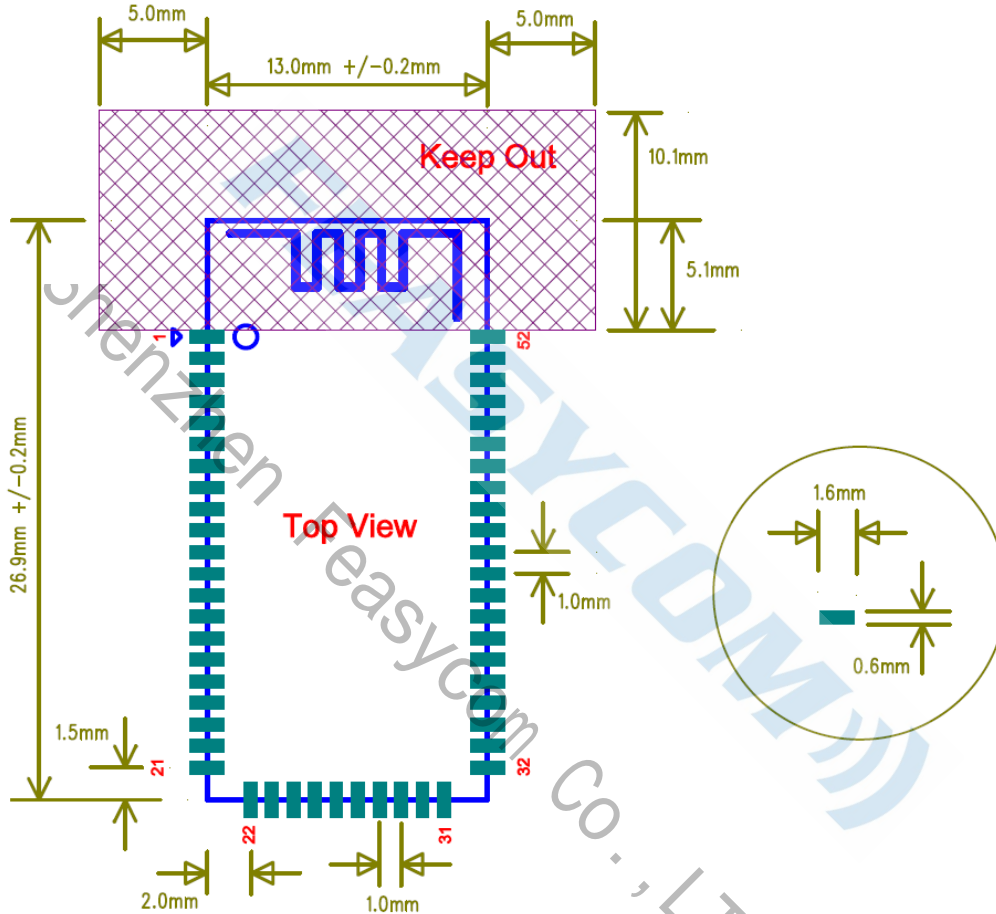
FSC-BT1032C footprint Layout Guide (Top View)
